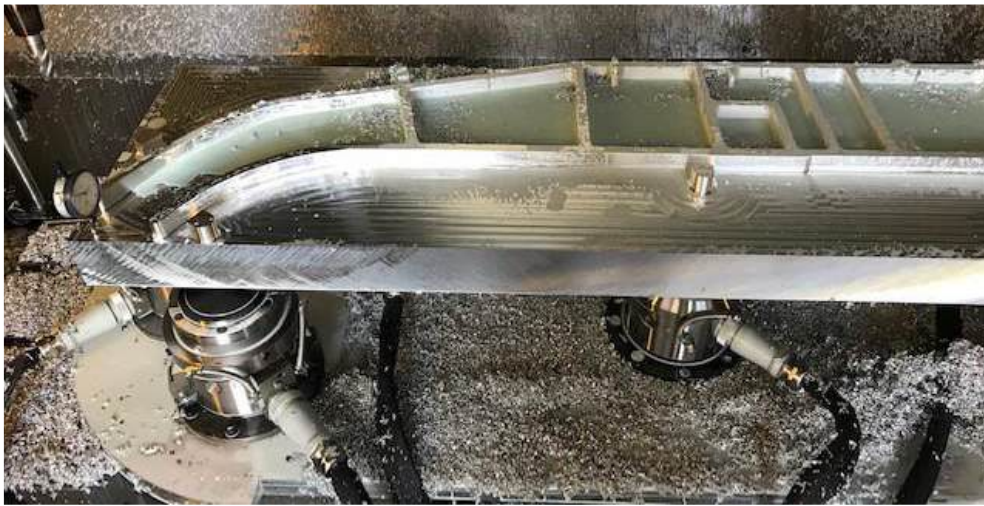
Milling test performed on the CNC machine - operation OP10.
